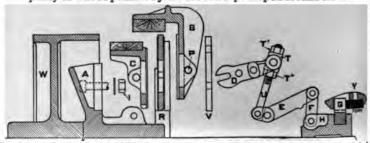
,817.—Sectional view of Hill clutch mechanism. In every case the mechanism hub A, and in a clutch coupling the ring W, is permanently and rigidly secured to the shaft and need not be disturbed when removing the wearing parts. When erected, the adjustment should be verified, and always with the clutch and ring engaged and at rest. If the just do not press equally on the ring, or if the pressure required on the cone be abnormal loosen the upper adjusting nuts T' on eye bolts and set up the lower adjusting nuts T until each set of jaws is under the same pressure. Should the clutch then slip when tarted it is evident that the jaw pressure is insufficient and a further adjustment will be necessary. All clutches are equipped throughout with split lock washers. Vibration or shock min not loosen the nuts if properly set up. The jaws can be removed parallel to the shaft of follows: Remove the gibs V, and withdraw the jaw pins P, then pull out the levers D. Do not disturb the eye bolt nuts T and T''. The outside jaws B can now be taken of Remove the bolt nuts I allowing the fulcrum plates R to be taken off. On the sepanhing the part of the clutch operating lever in the position as shown in fig. 2,816 to avoid interference with mechanism parts. Oil the moving parts of the clutch. Keep it clean. Examine at regular intervals.
